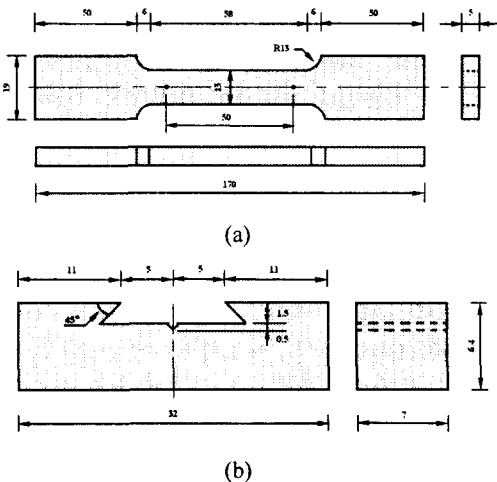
Geometry of tension test specimen and CTOD test specimen (unit : mm)
